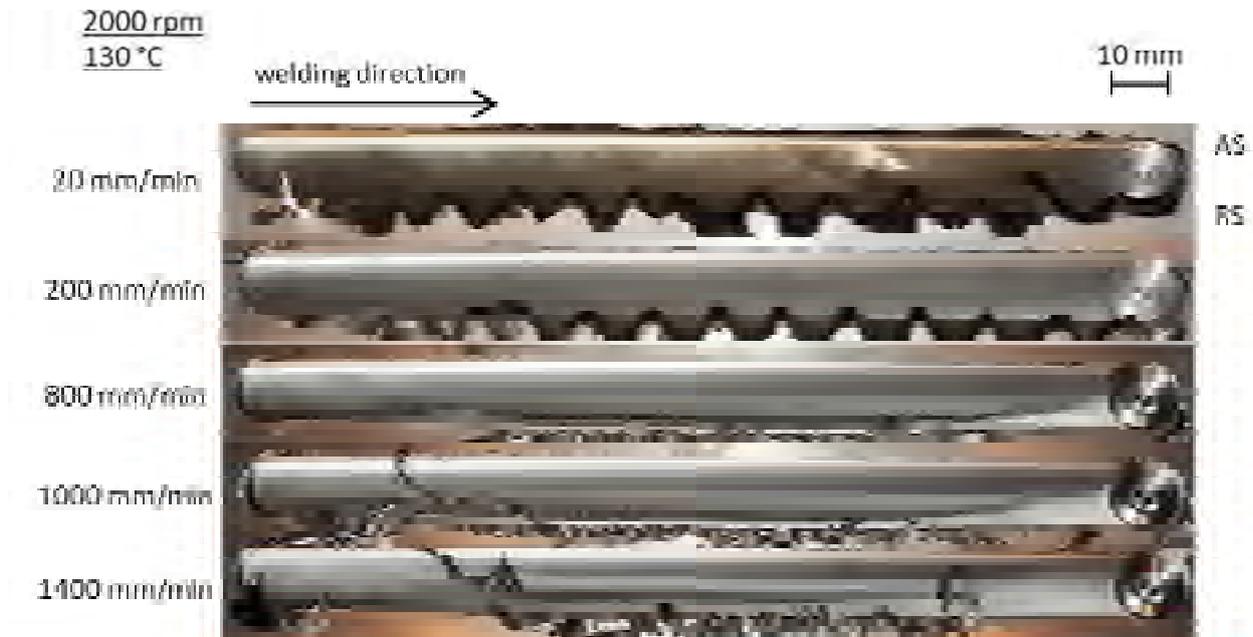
surface appearance of FSW of extruded Mg (bead on plate weld) for different welding speeds at constant rotational speed and a starting temperature of  $130 \text{ }^\circ\text{C}$ .
